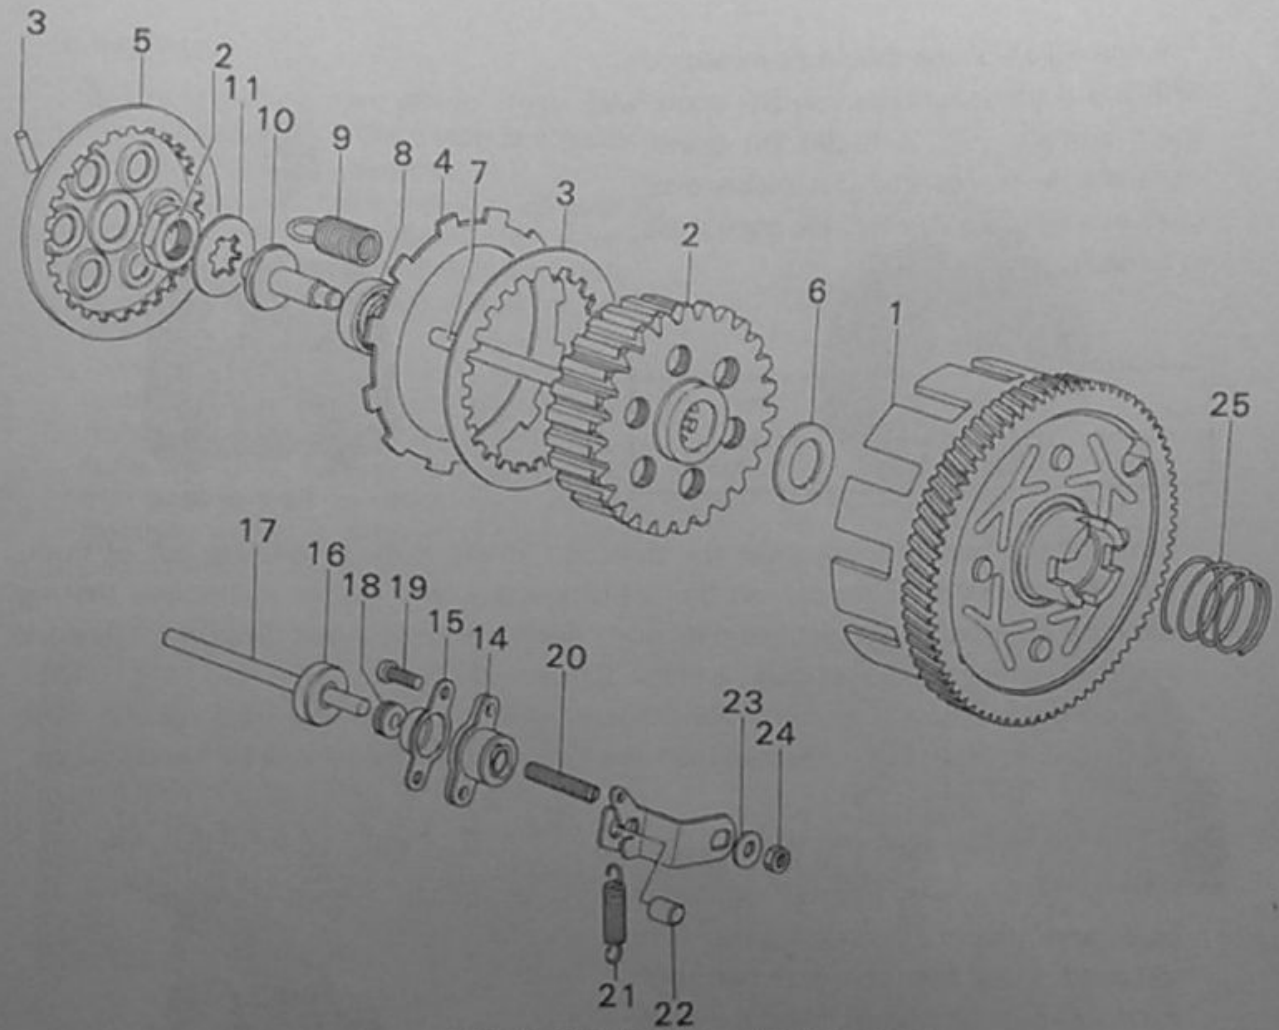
Exploded view of TS90/TC90 clutch
